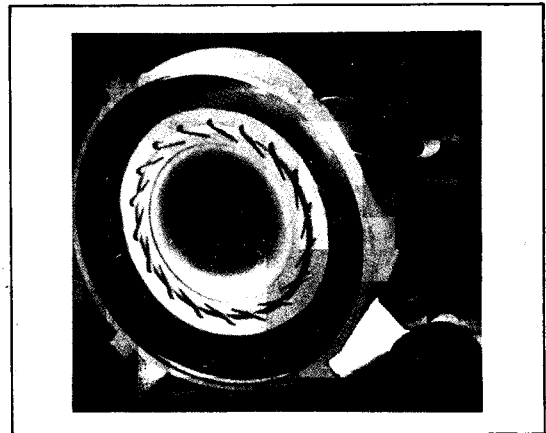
Silicon carbide engine component with ultrasonically machined vane cavities.
